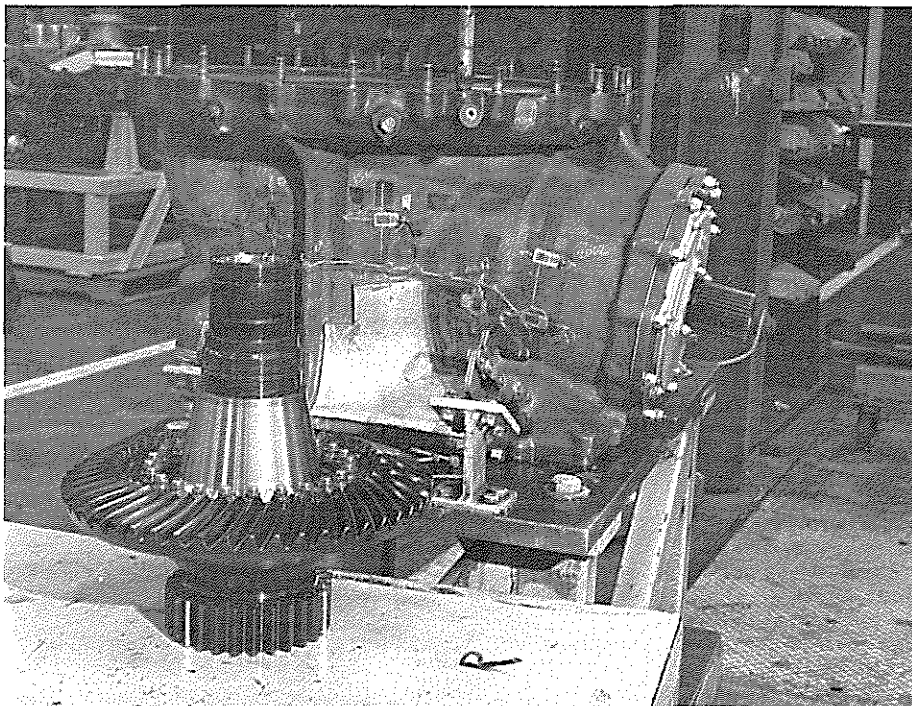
Installation of Detuning Sleeves on Sun/Bevel Gear and Plates on Transmission Lower Case.
